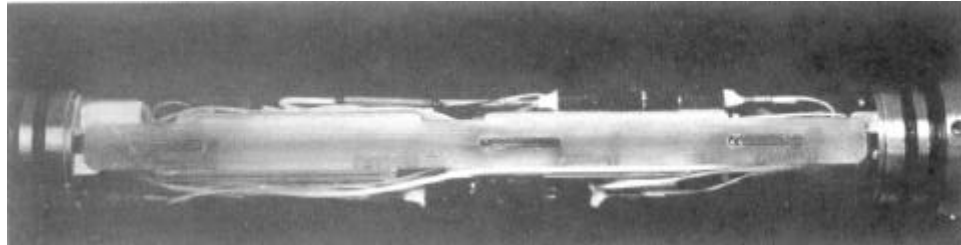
SIDE VIEW OF E-O REPEATER ELECTRONICS ASSEMBLY.
